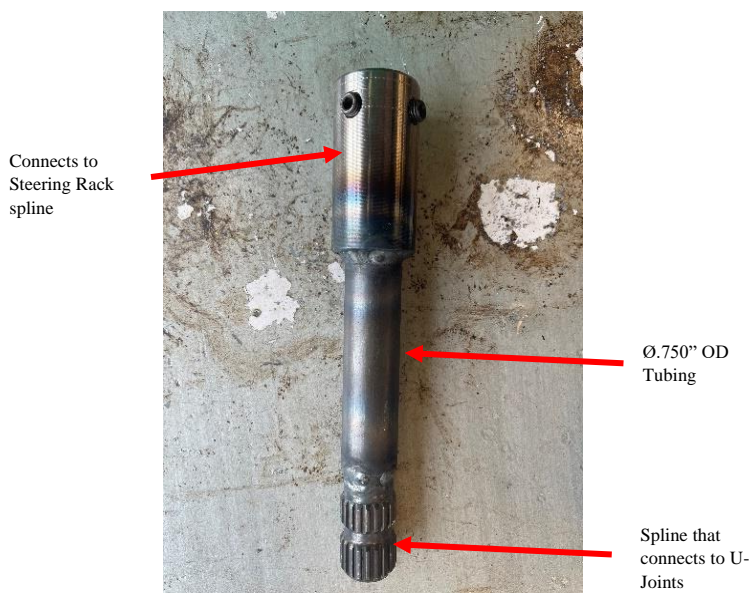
Lower steering column assembly, Steel, Lower piece fits into KAZ Tech Rack
